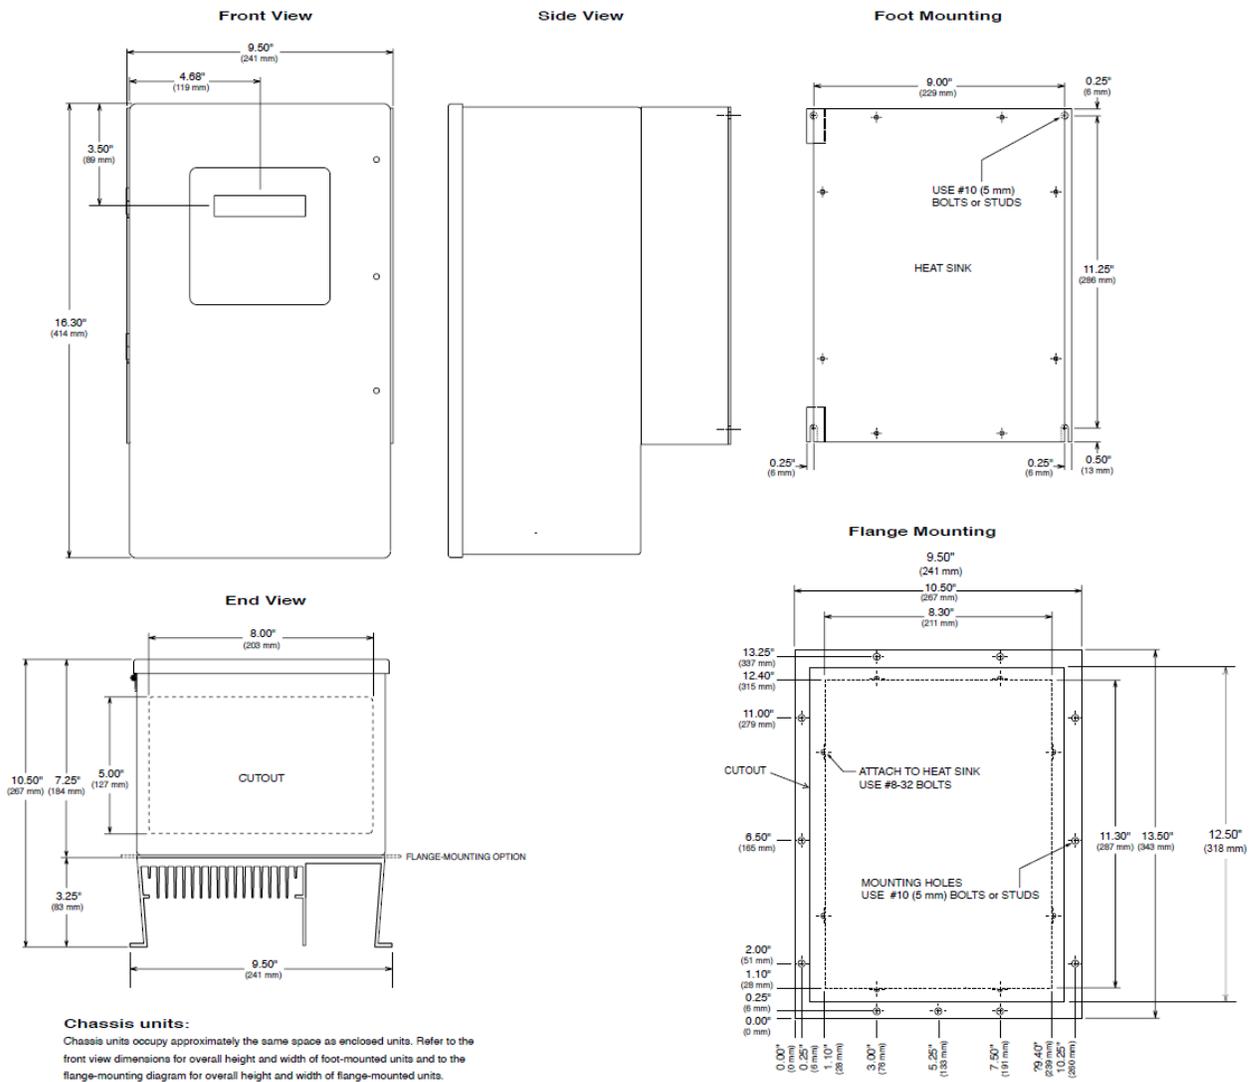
Form 12N Mounting Dimensions (1105 and 1120 Drives)
